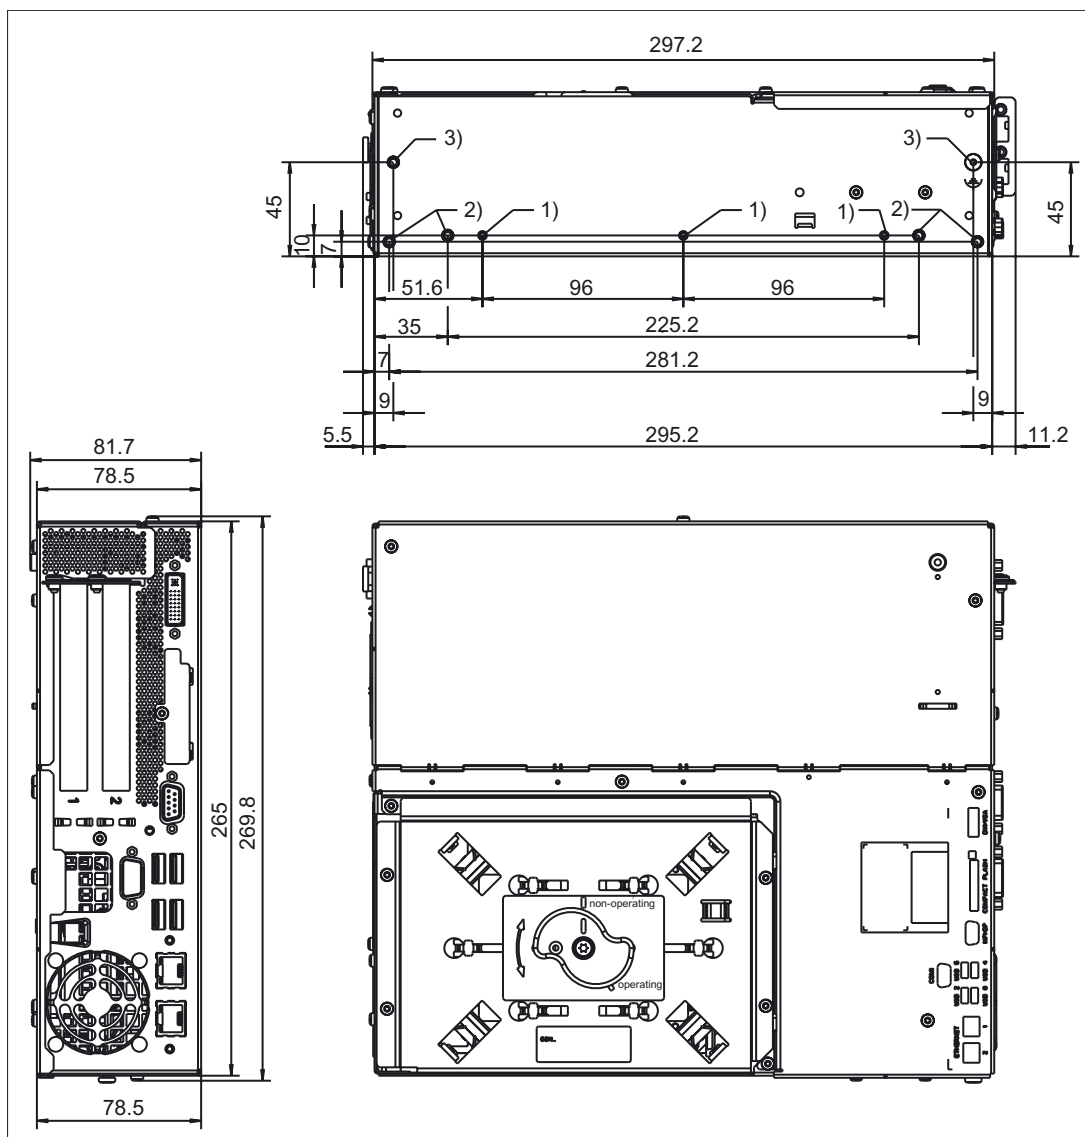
PCU 50.3 dimension drawing for mounting without ETH strain relief
